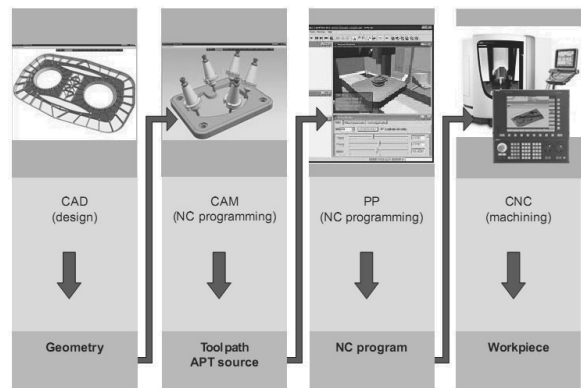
The sequence of making process of machine parts in modern CNC systems [12]
